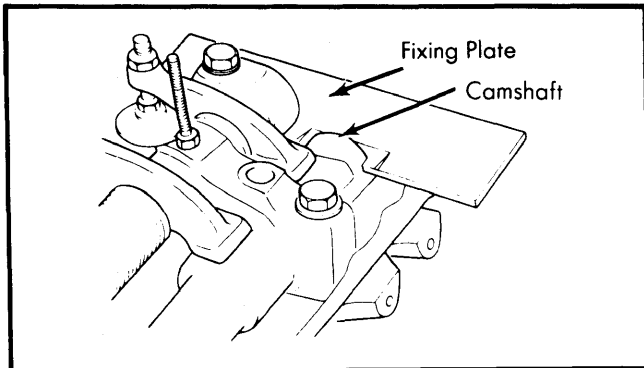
I-Mark Camshaft Fixing Plate Installation
